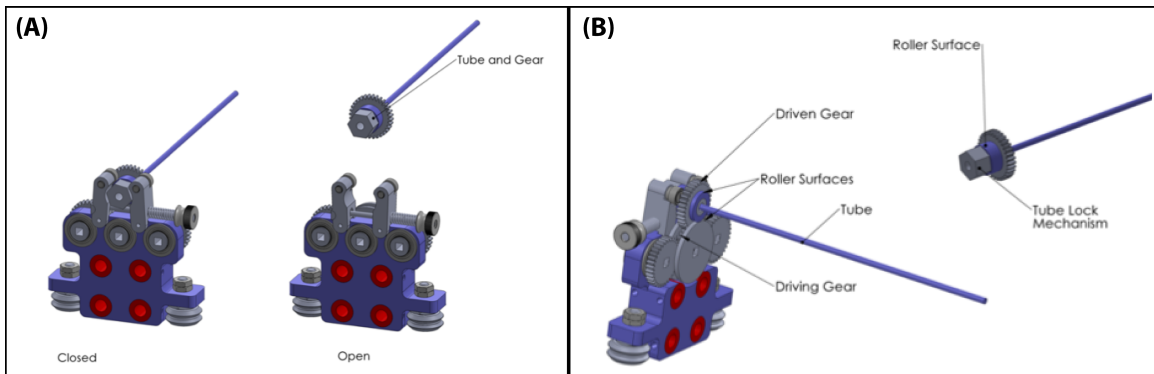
The quick-connect mechanism depicted in closed and open configurations for tube loading in (A), rolling contact surfaces and collet connecting the tube to the gear in (B)
